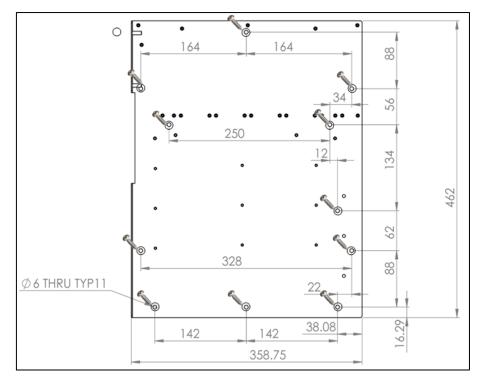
Platinum Pro 30 and Platinum Touch 30 Back Panel Dimensions
